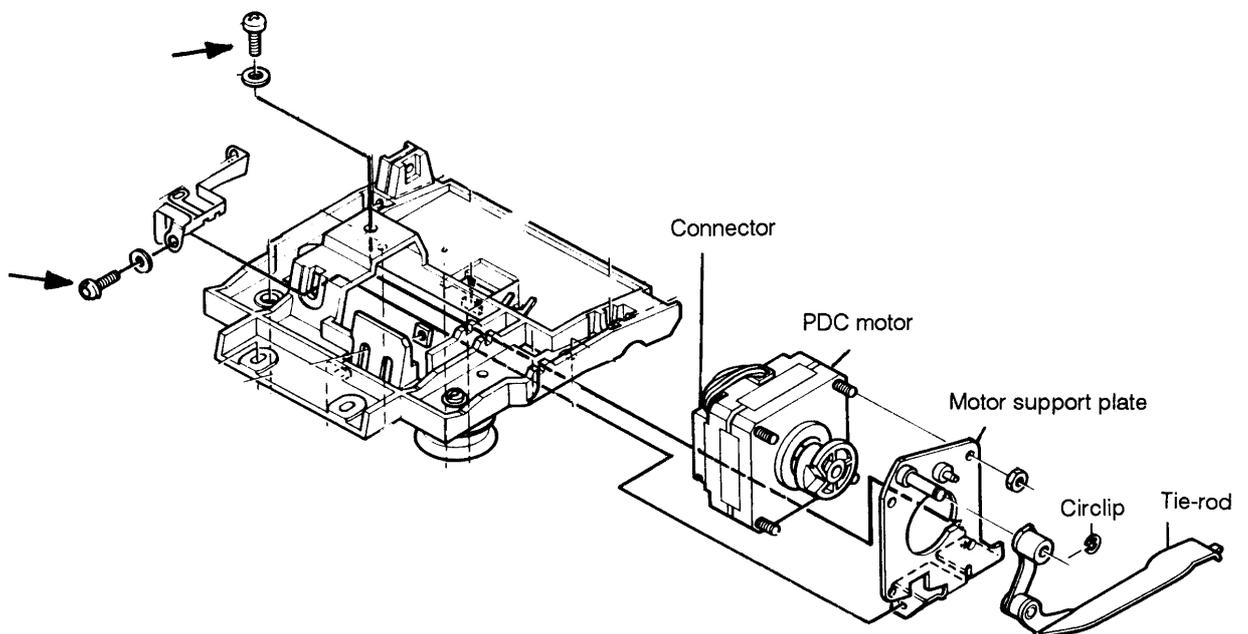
Removing the PDC motor (this figure is intended for parts identification only)
